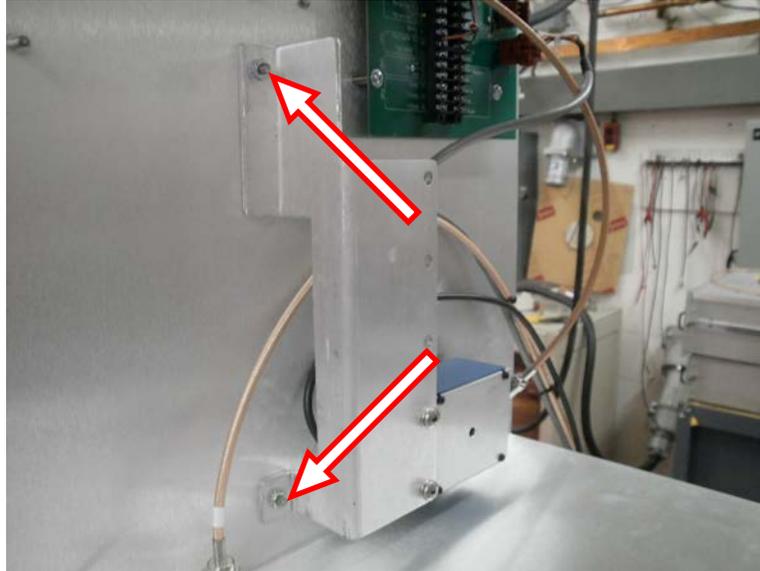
FMi 703 and 1405 Mounted Attenuator Bracket
